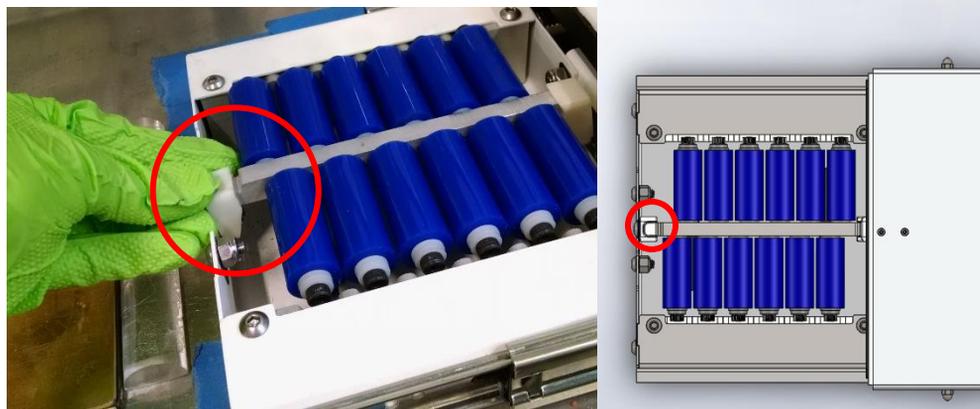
Ensure that the retaining latch catches on the notch of the roller assembly in order to properly secure the rollers (see red circle in installation picture, left, and overhead view rendering, right).
